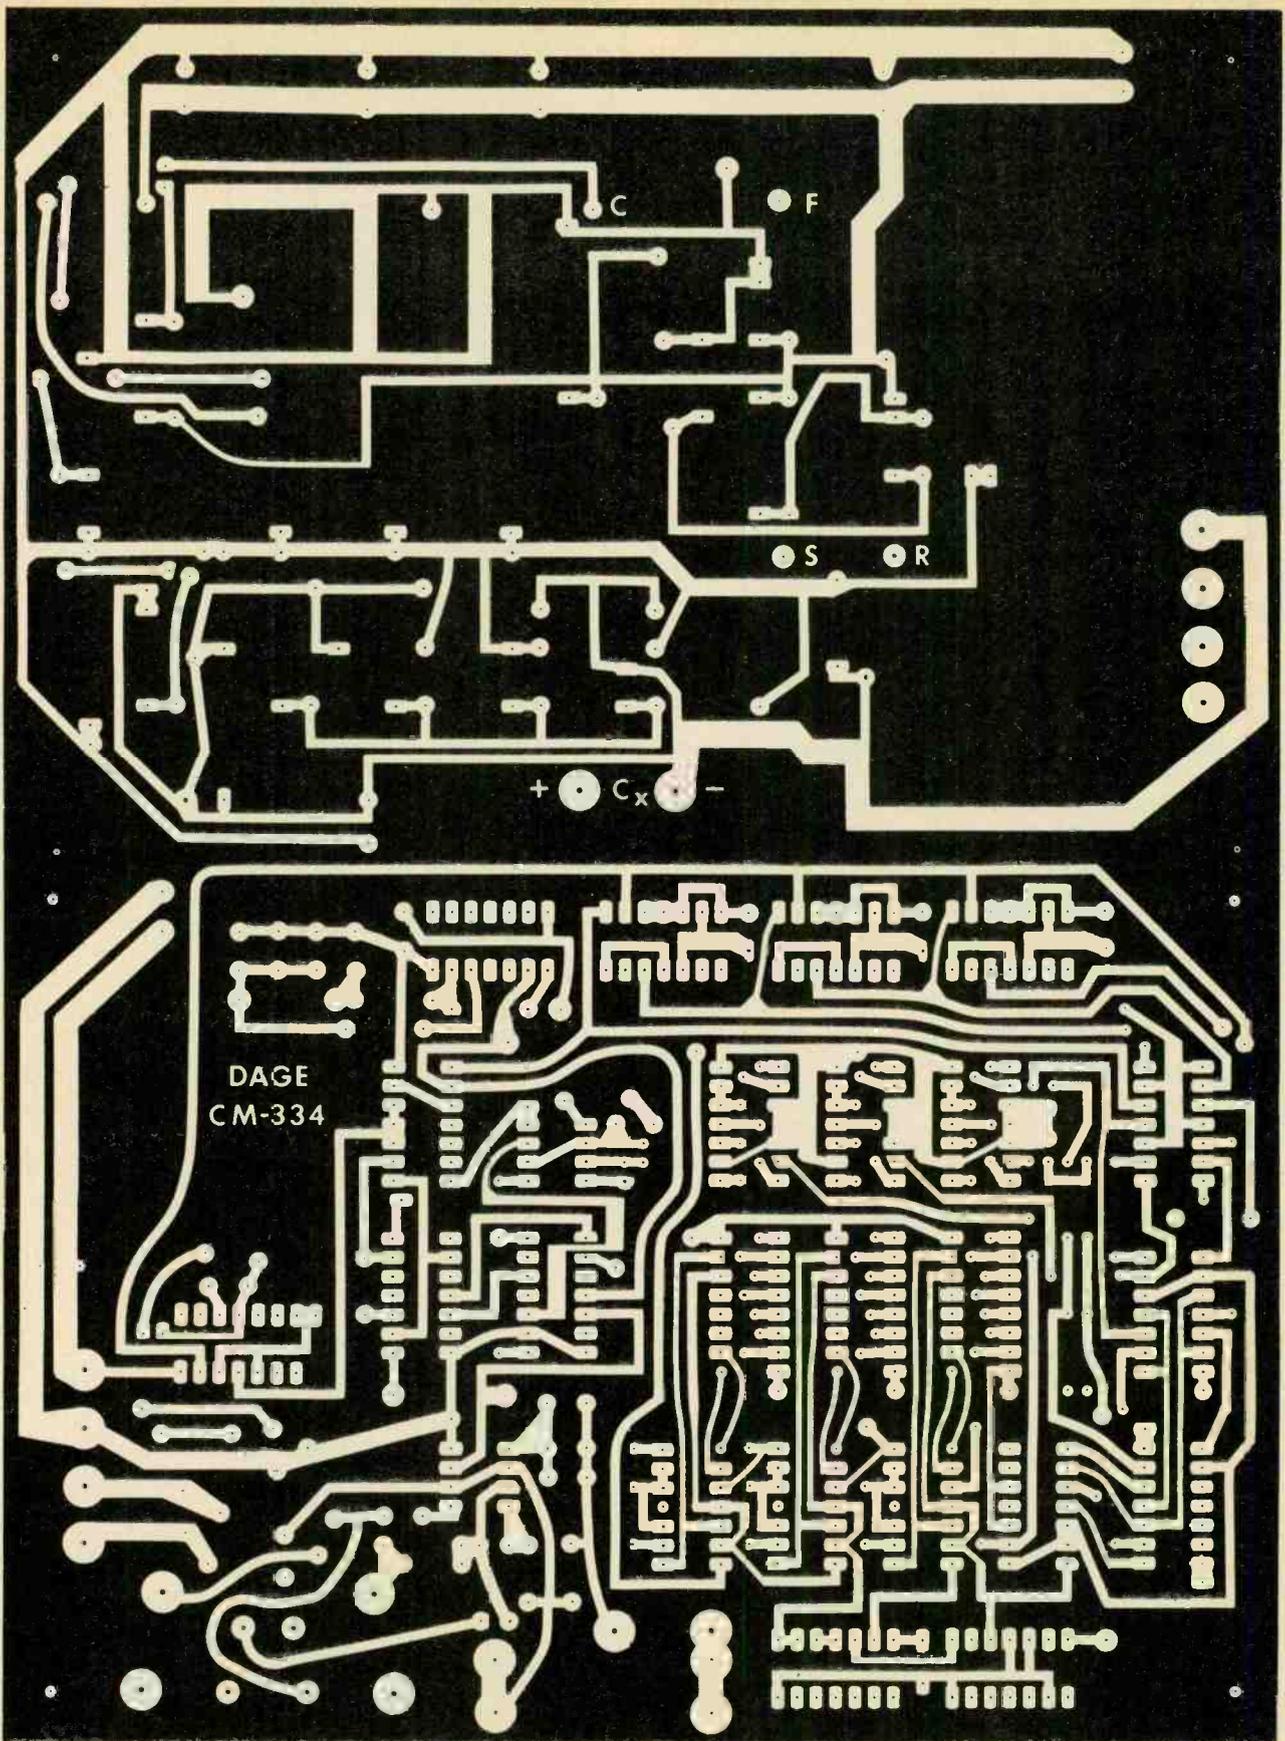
Actual-size etching and drilling guides for the double-sided pc board.
